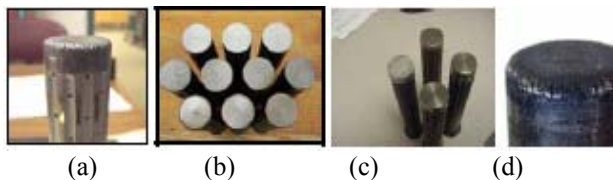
Photograph of H13 hot die forging anvils (a) after use (~6000 cycles) and (b) LPD clad, (c) clad and finished machined and (d) NiTung60 clad anvil after ~10,000 cycles.
